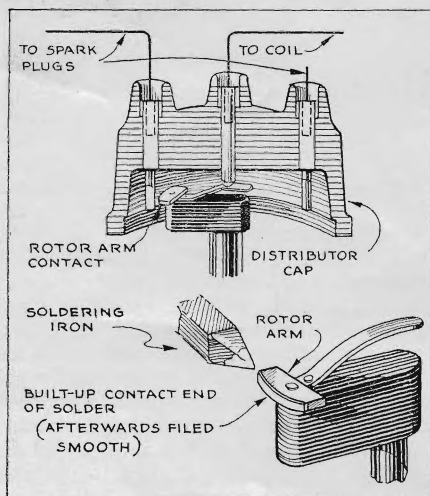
Shows how to build up, with solder, the burned away end of distributor arm in an old car and make it run.
